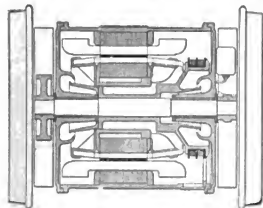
SECTIONAL VIEW OF MOTOR □
